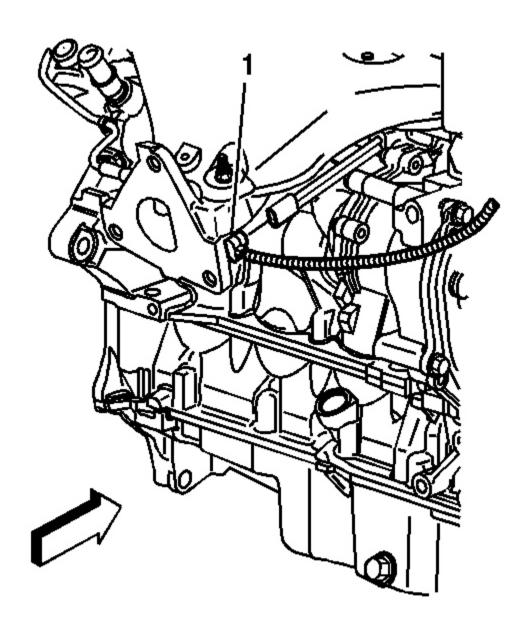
Coolant Heater View Courtesy of GENERAL MOTORS CORP.
